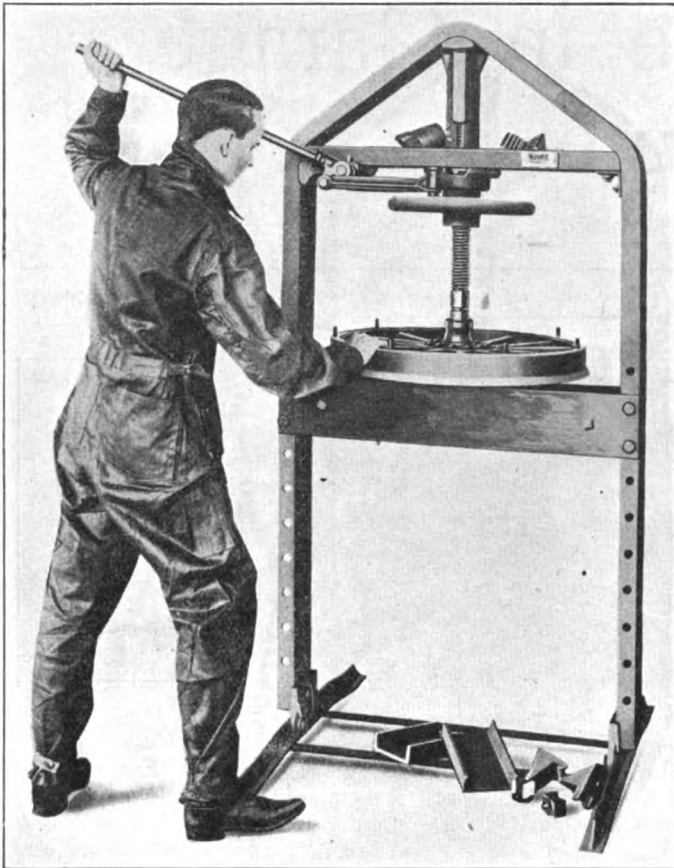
PORTABLE PRESS OF THE SCREW TYPE FOR STRAIGHTENING BENT PARTS
